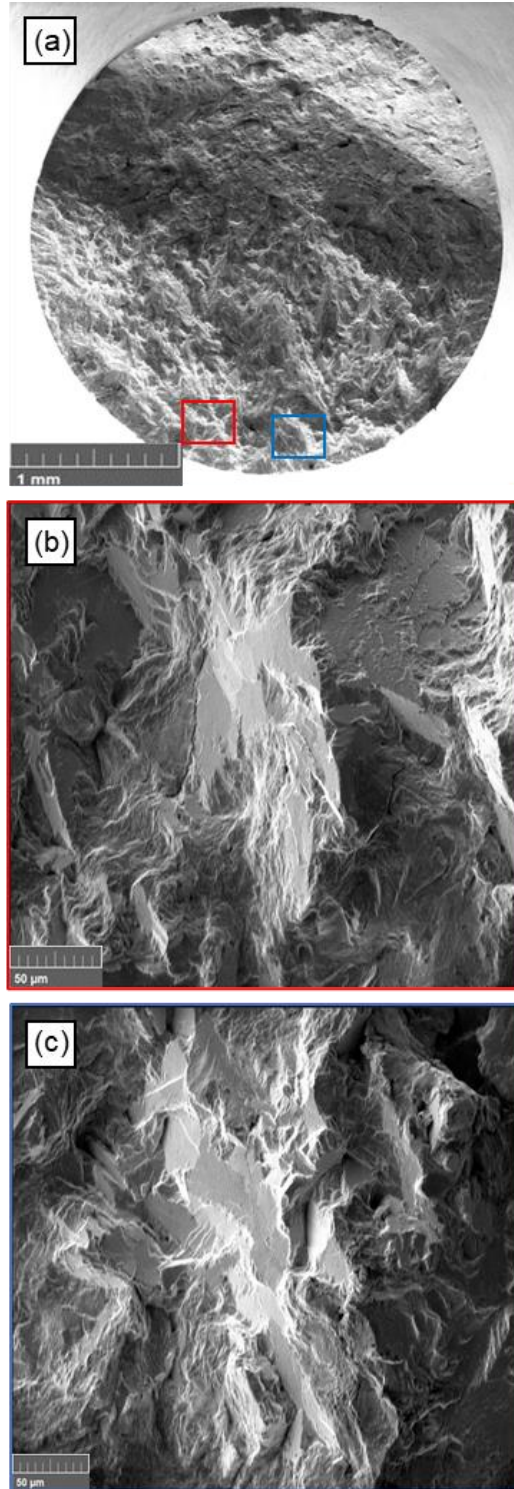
SE fracture surface images of a machined D LB-PBF Inconel 718 specimen tested at $\sigma_a = 500$ MPa with a corresponding fatigue life of $2N_f = 7.77 \times 10^6$ reversals. The overall fracture surface in (a) showed the possibility of multiple crack initiation sites. The images (b) and (c) show possible crack origin facets.
